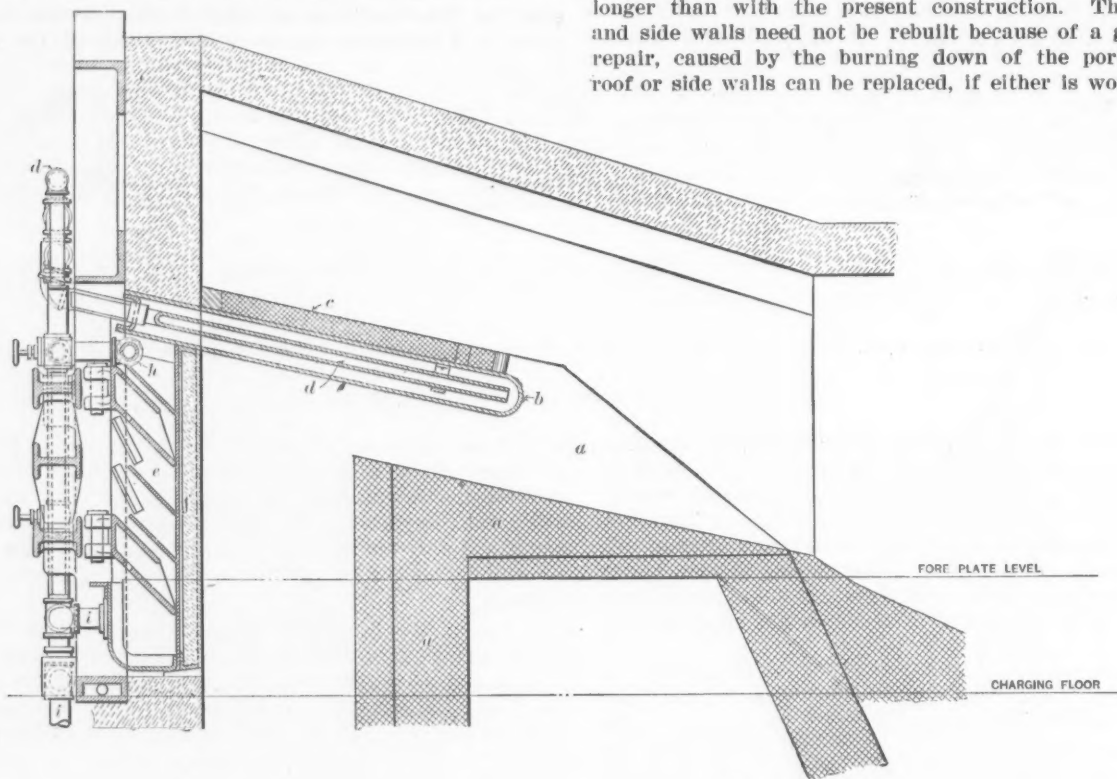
Sectional View of the Blair Port and Bulkhead for Open Hearth Furnaces.
